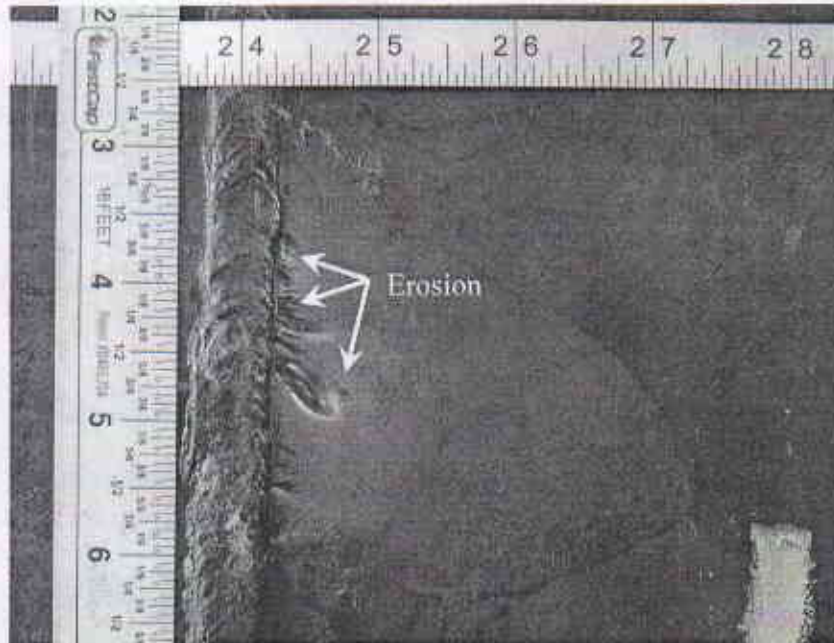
Photograph of area that appears to be eroded adjacent to the girth weld. Scale shown is in inches.
